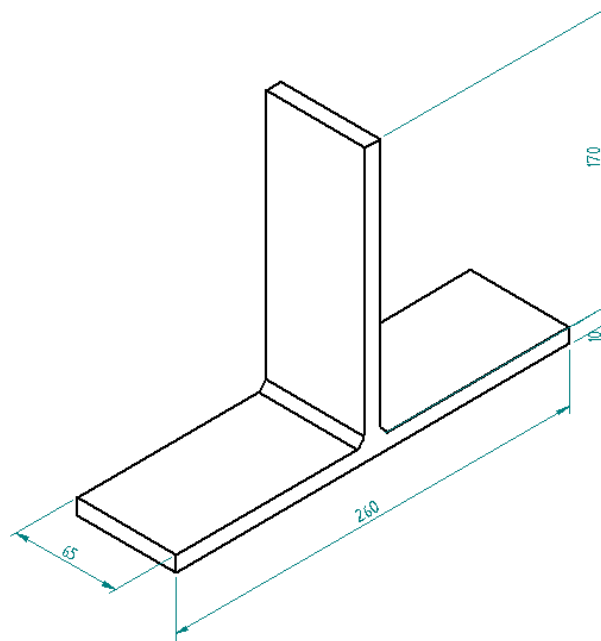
Geometry and dimensions of the test specimen (dimensions in mm).
